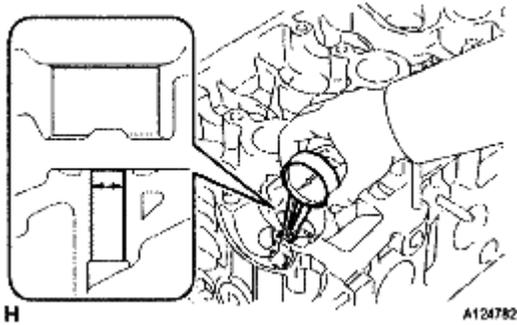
Measuring Bush Bore Diameter Of Cylinder Head
